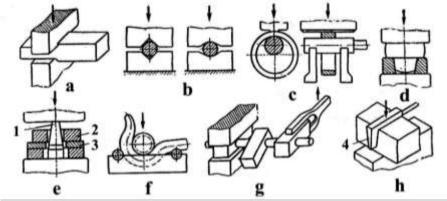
The main hammering operations: a, b – drawing; c – ring rolling; d – heading; e – piercing; f – bending; g – twisting; h – cutting off
